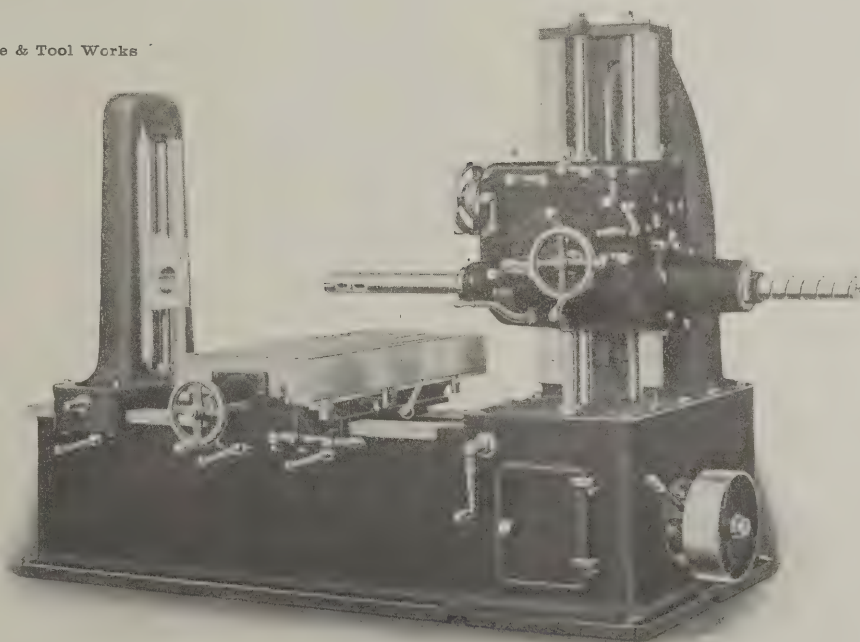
Rochester Boring, Milling, Drilling and Tapping Machine
